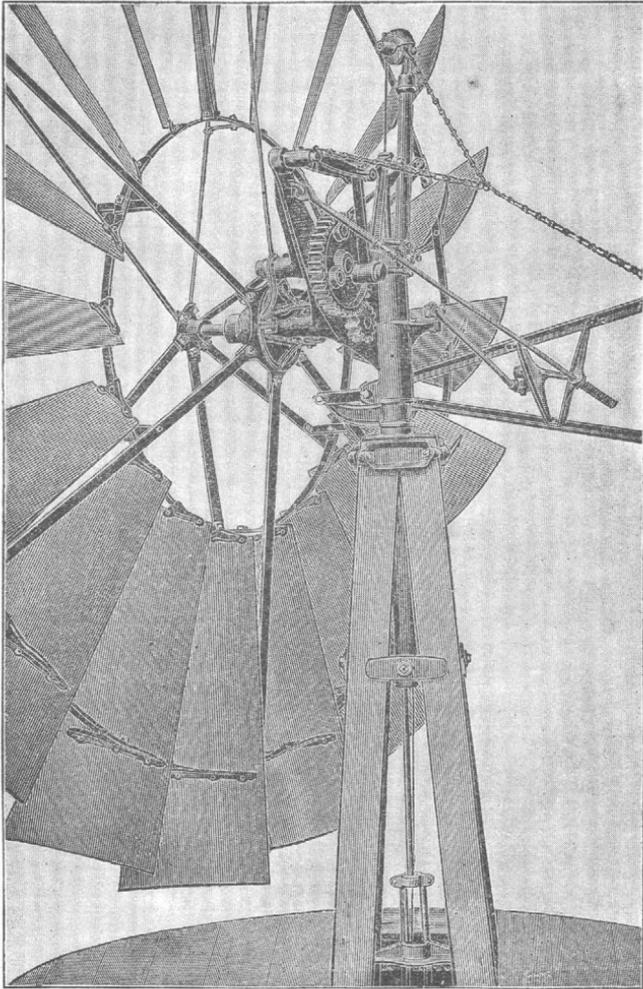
Working parts of mill No. 51—8-foot Monitor.
